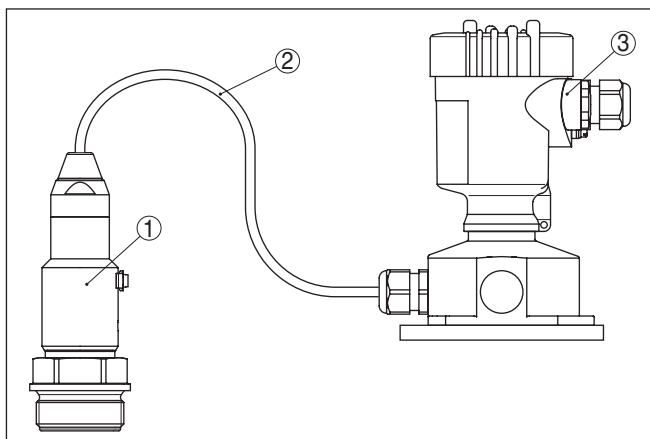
VEGABAR 82 in IP 68 version 25 bar with axial cable outlet, external housing
